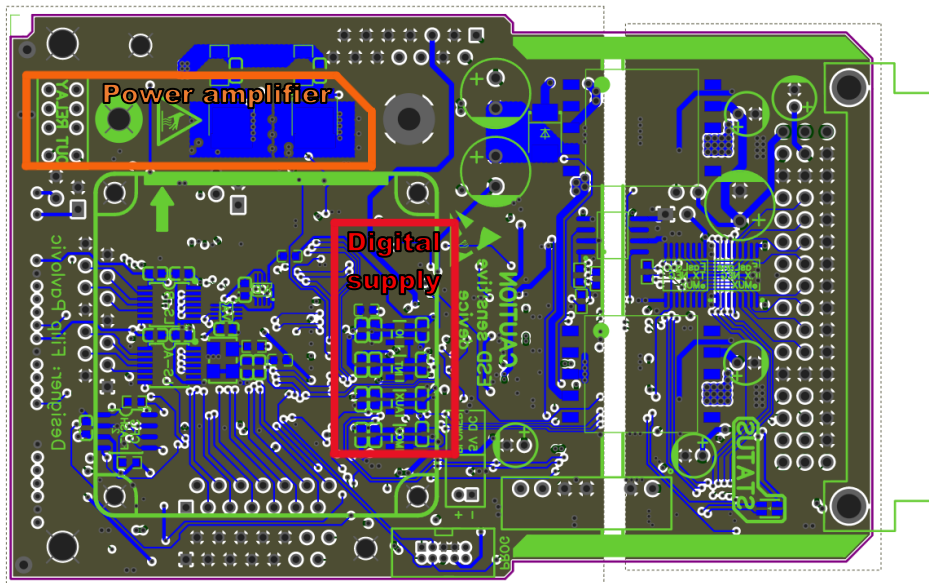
Board layout with highlighted circuit segments (Bottom side)
